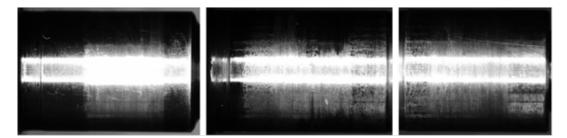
Damaged shafts of turbochargers (place of cooperation with a slide bearing)
